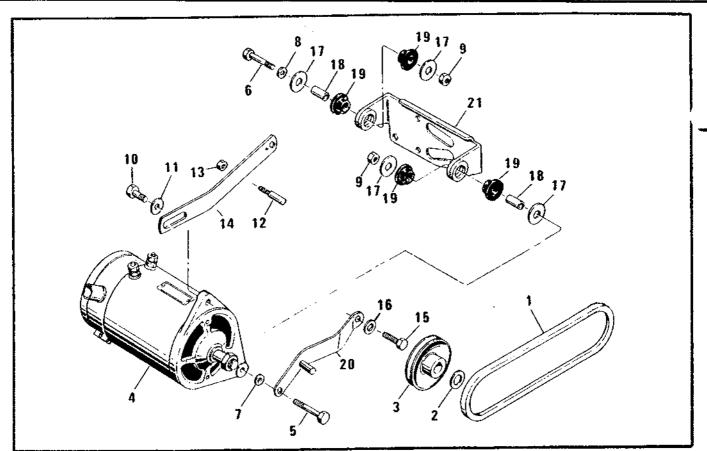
GENERATOR AND MOUNTING BRACKETS
